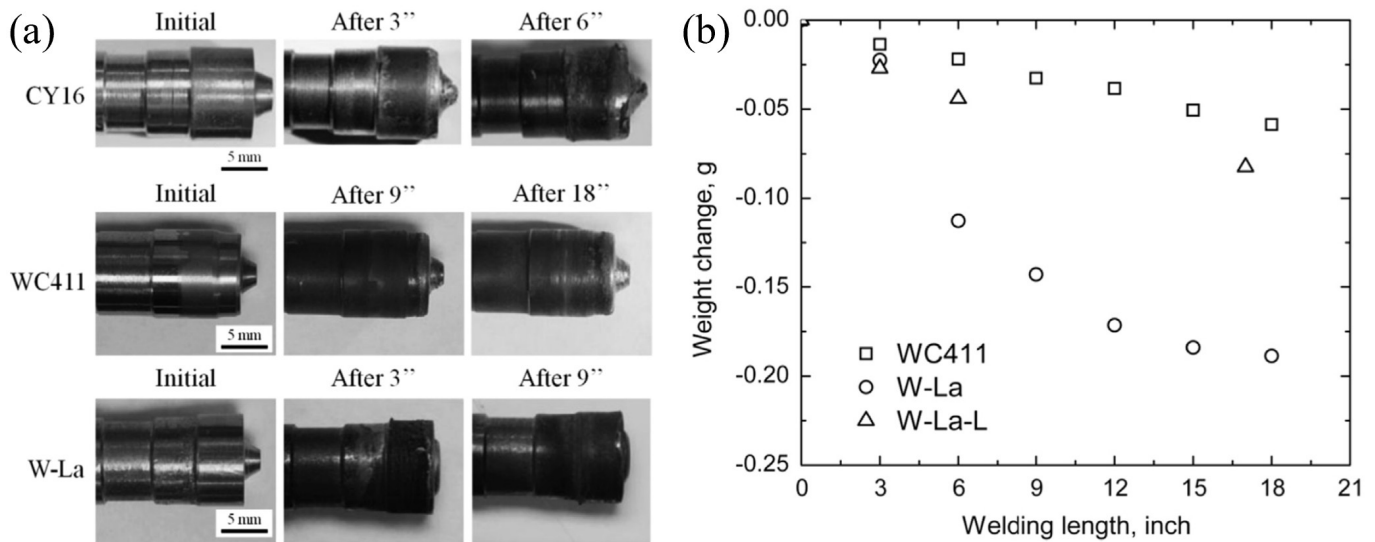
Butt FSW of 2 mm thick Ti6Al4V. (a) Appearance of the tools after different welding lengths (the total length of accumulative welds was different for the three different tools). (b) Weight change versus total welding length for WC411, W-La, and W-La-L tools (the weight measurements were made without any physical cleaning of the tool, and some Ti6Al4V alloy may be sticking to the tool). Process parameters: ω 900–1100 rpm, v 25–50 mm/min [202].
